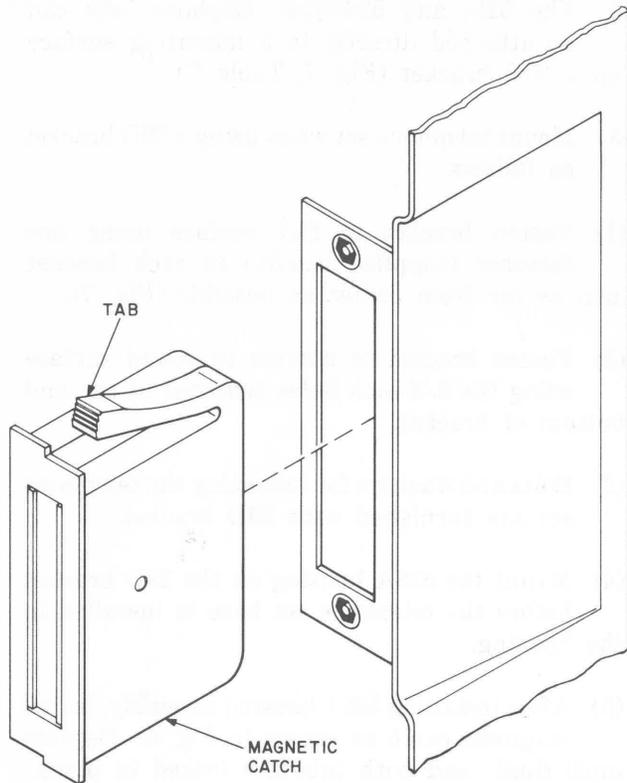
Partial View of 526A Housing Assembly, Installation of Magnetic Catch
